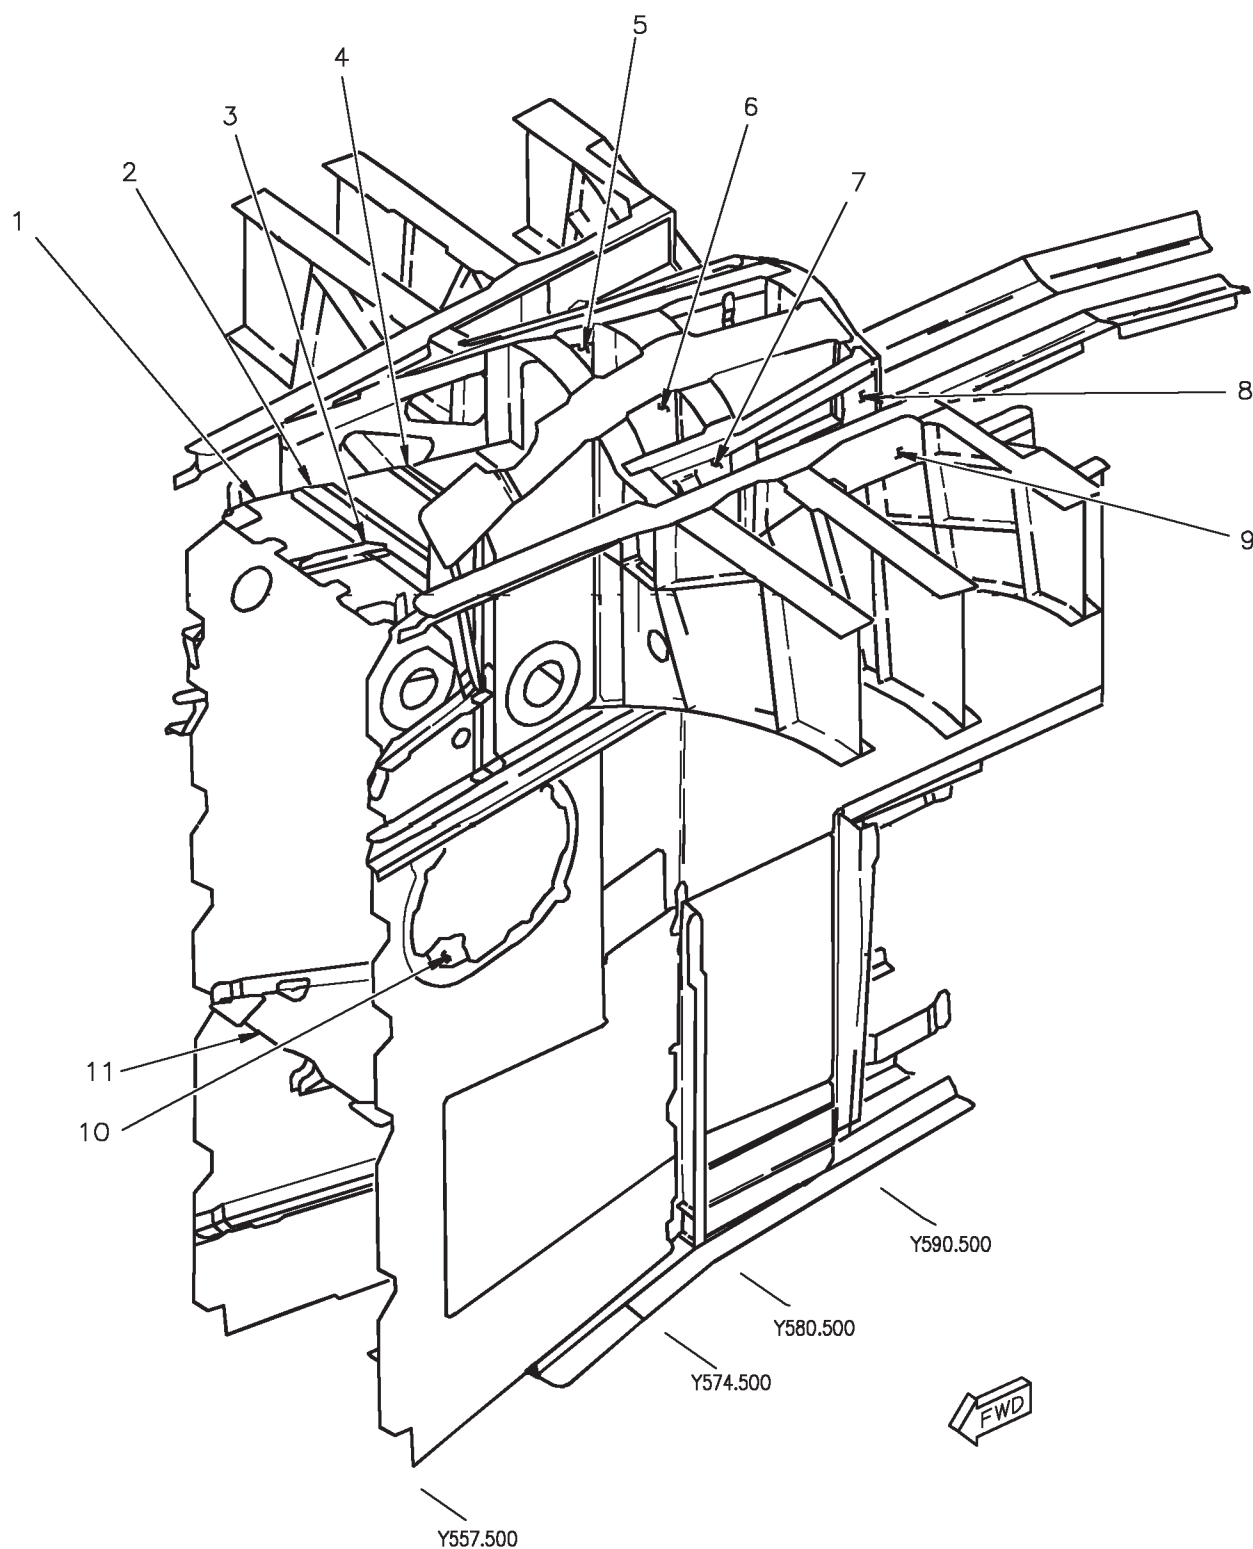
Aft Fuselage Corrosion Prone Areas (Sheet 1)
